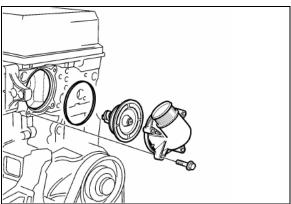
THERMOSTAT HOUSING (VOLVO D13 ENGINE)
